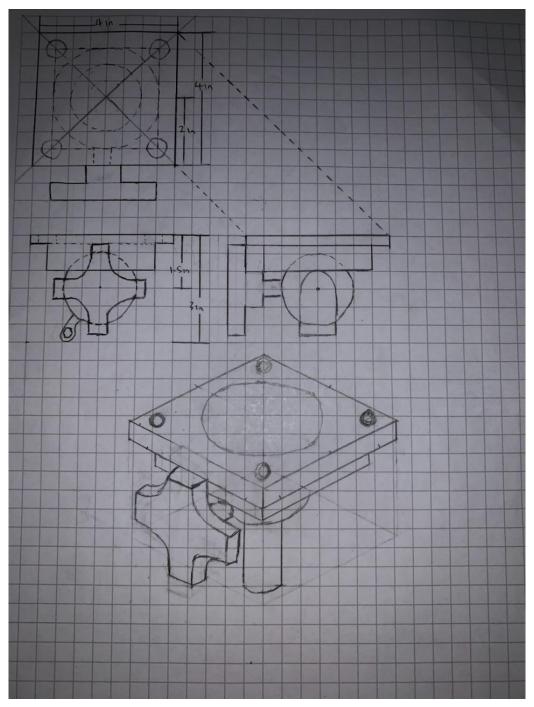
Image B. Orthographic and isometric drawings of the ball and socket mechanism.
